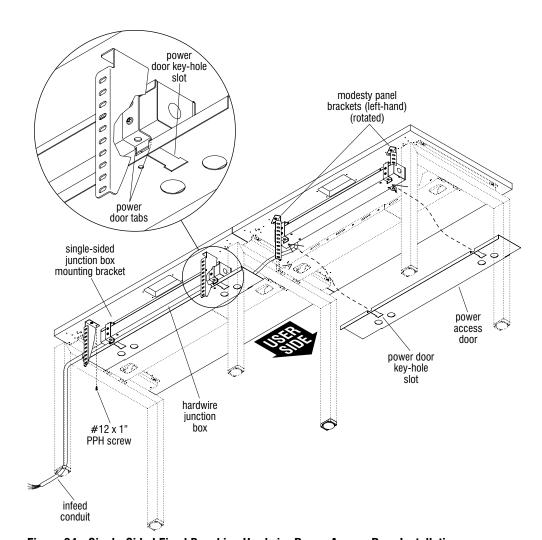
Single-Sided Fixed Benching Hardwire Power Access Door Installation
